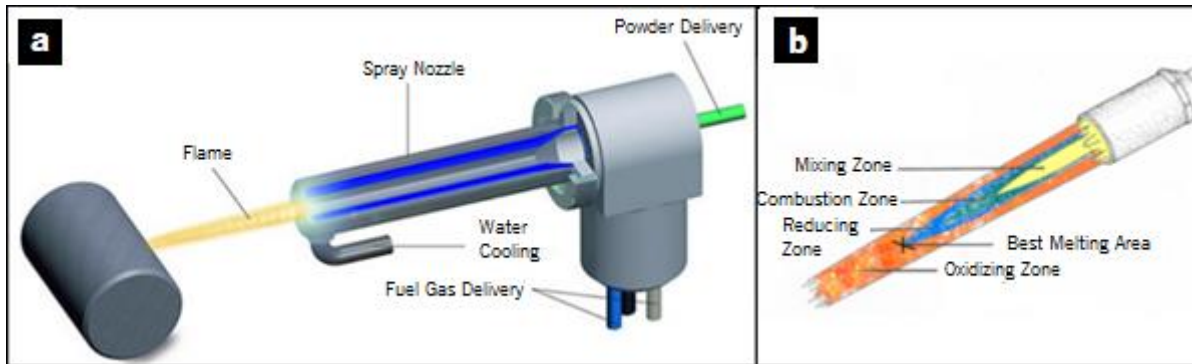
a) Flame Casting Technique b) zones of the flame from flame casting [58,59].
